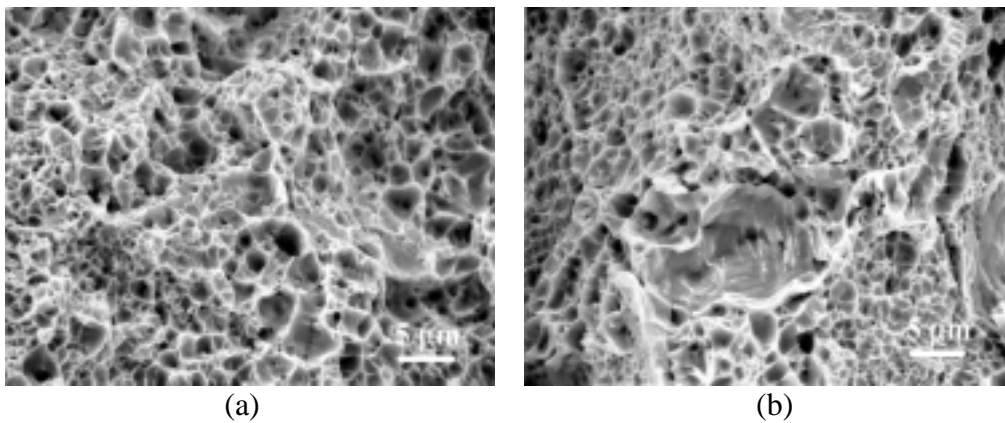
Fracture morphologies of tensile specimens tested at 288 °C; (a) as-received (b) hydrogen-charged
